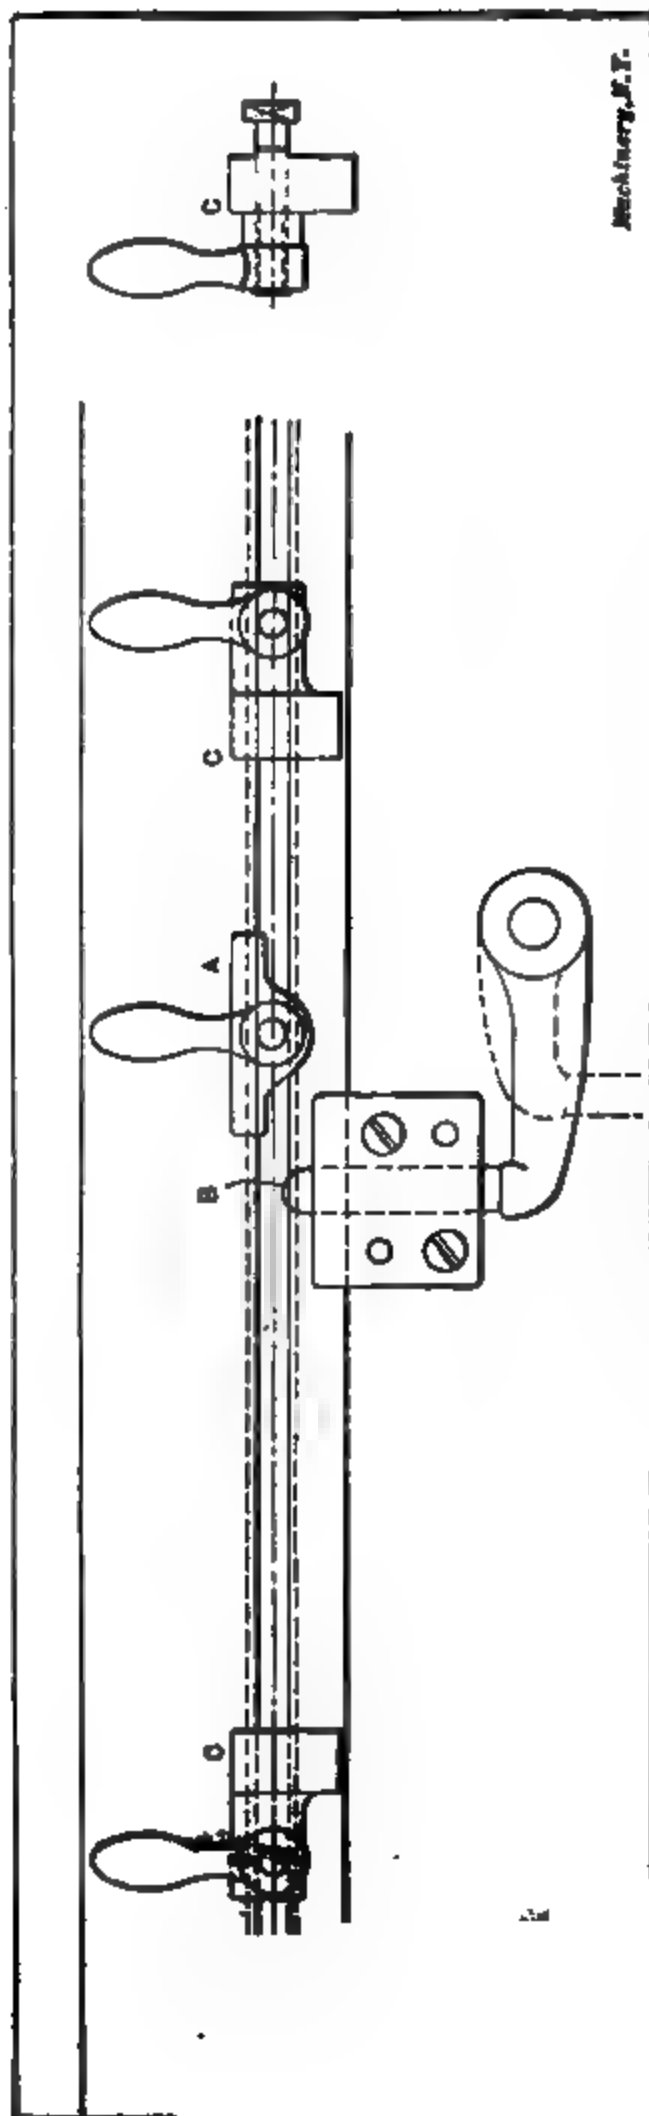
Combined Trip and Dead Stops for Milling Machine Table
